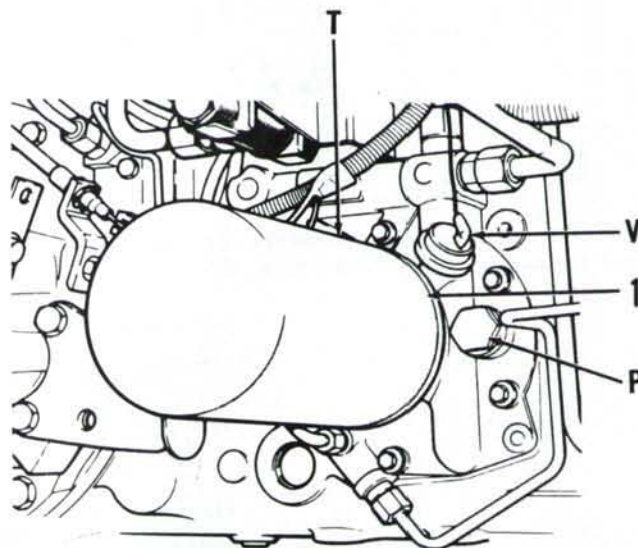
View of main hydraulic system filter installed on models with tandem gear pump. Auxiliary filter (2—Fig. 31) is installed on these models if also equipped with engine mounted auxiliary pump. Filter is located on right side under floor. Switch (V) indicates blocked filter, and switch (T) is the low temperature switch which stops blocked filter indicator from lighting when temperature is below 40° C (104° F). Low pressure switch is located to the rear of switch (T).
